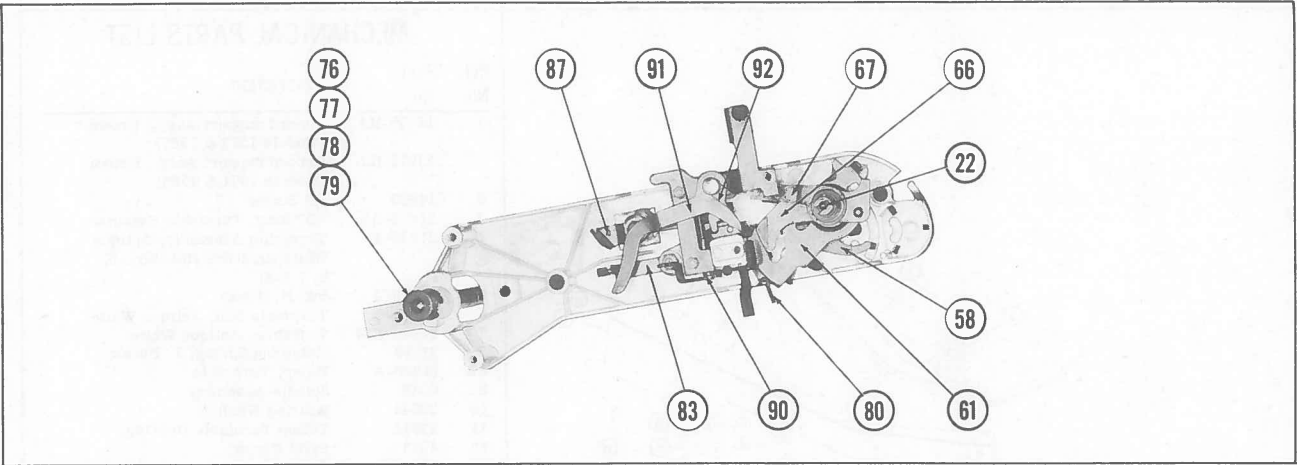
Bottom View of Cycling Mechanism With Slide and Cam Gear Removed.
